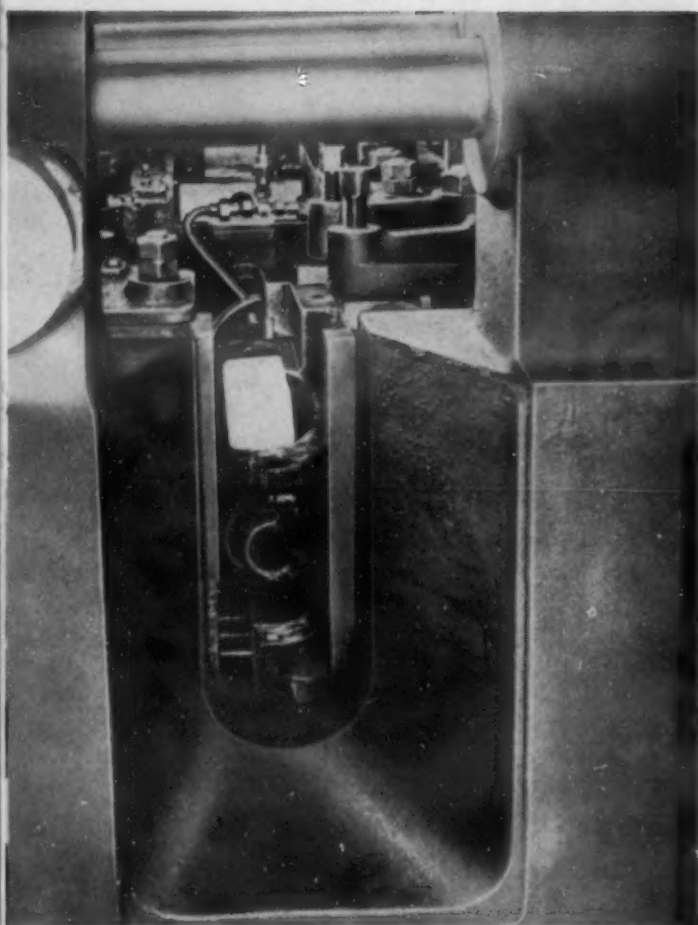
A hot billet in the split dies on the Baldwin-Omes machines.
